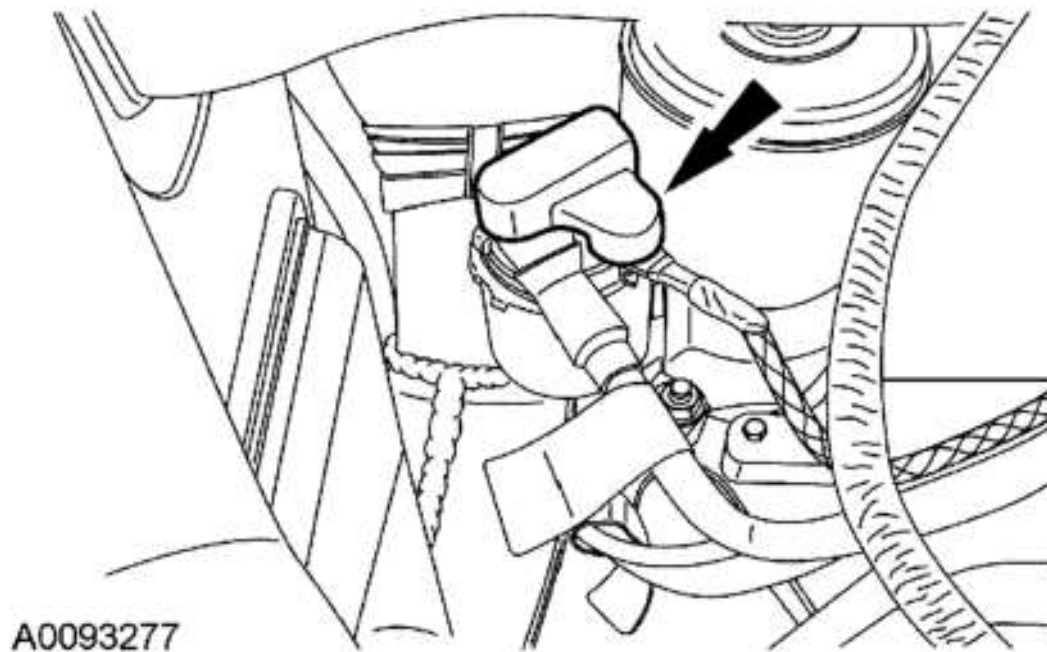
Removing Plastic Starter Motor Electrical Connector Cap
